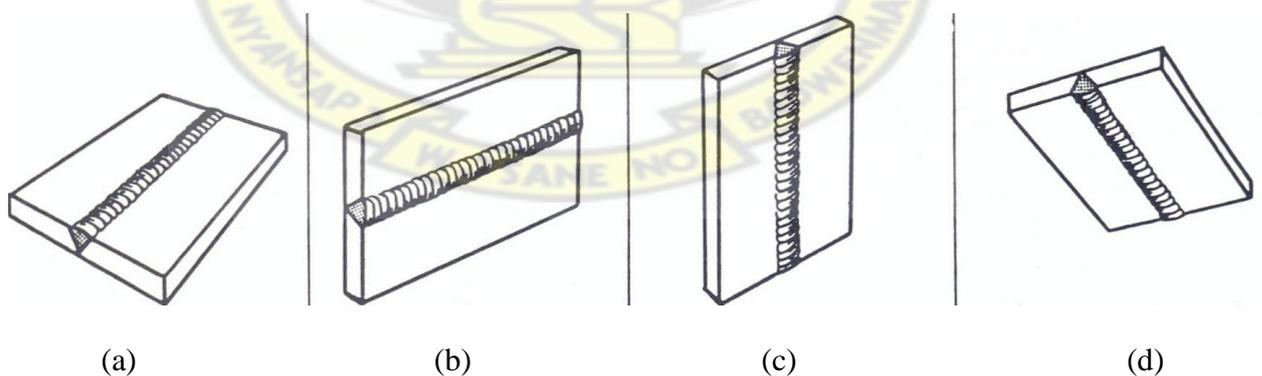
Welding positions (defined here for groove welds): (a) flat, (b) horizontal, (c) vertical, and (d) overhead. (Cary, 1997)
